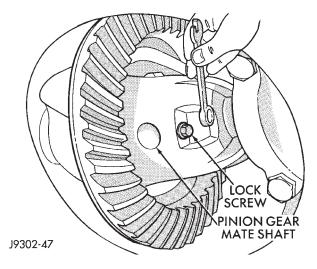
Pinion Gear Mate Shaft Lock Screw
